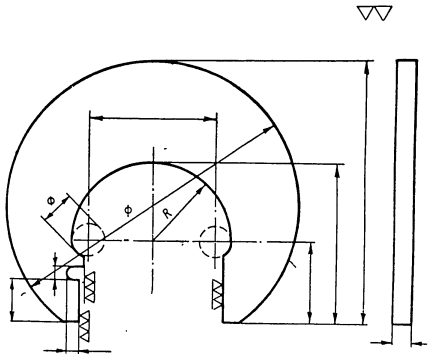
Blank Drawing for Standardized and Typical Tooling
